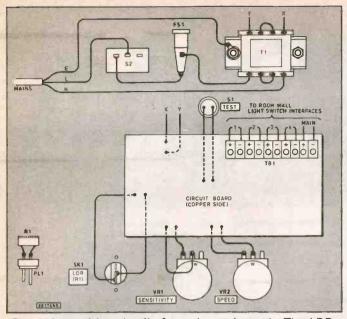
Interwiring details from the main p.c.b. The LDR (R1) is mounted directly on PL1 during testing only. It should be wired remote from the unit.
